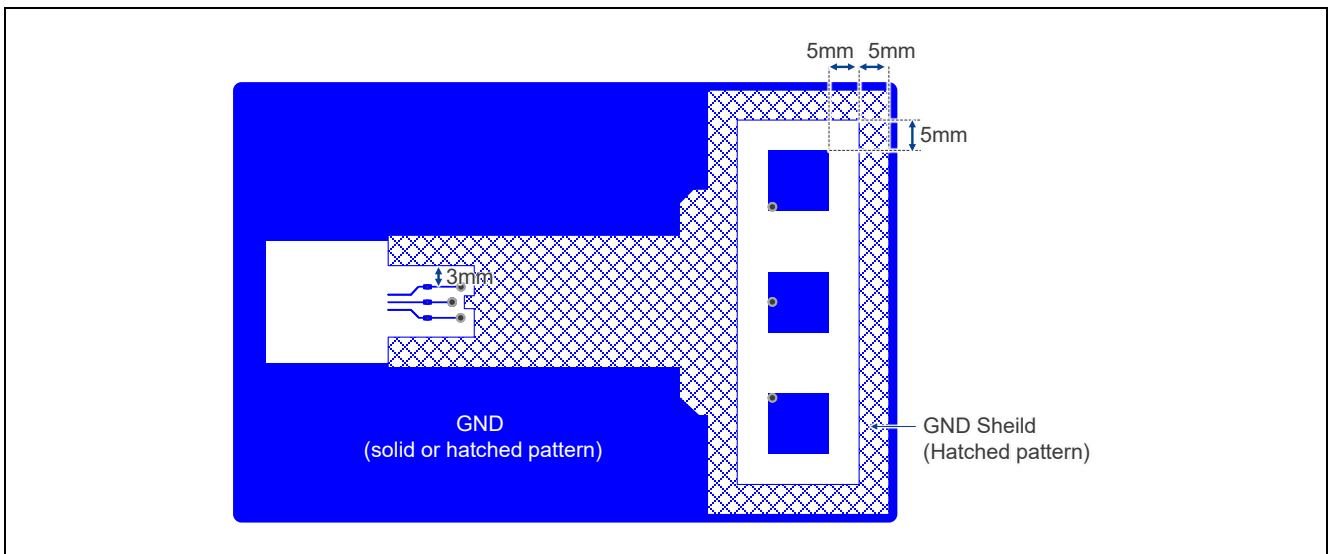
GND Shield Pattern Example for Multi-layer Board (top layer)
